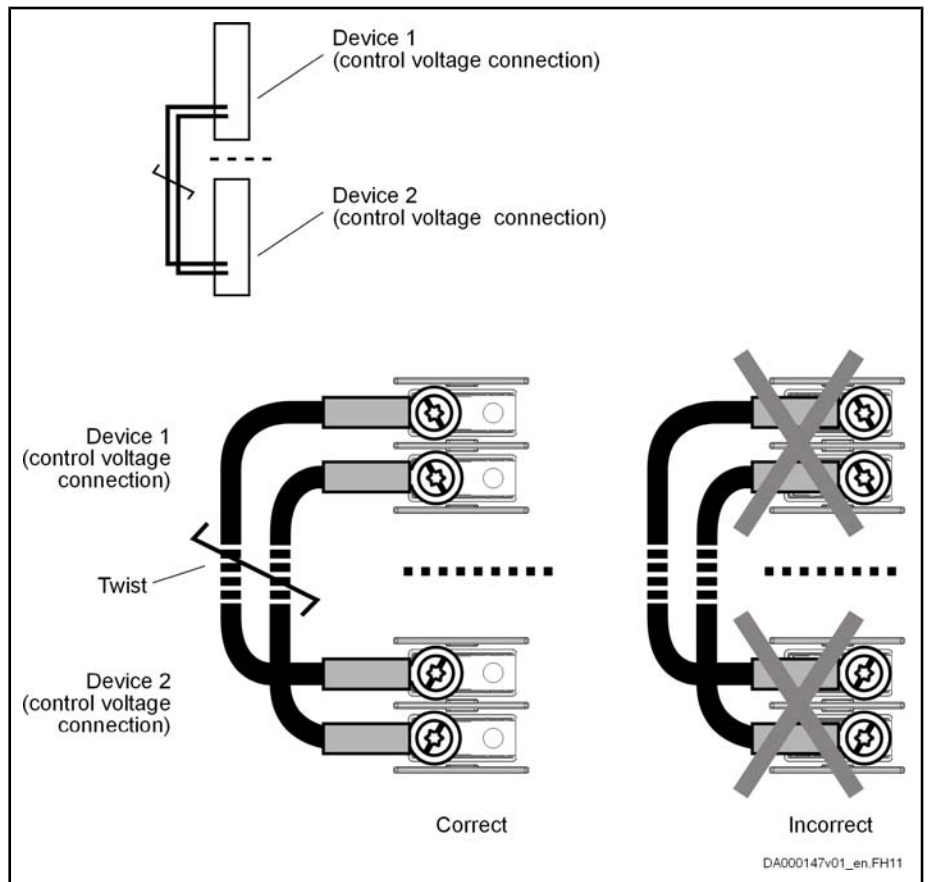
Control Voltage Connections for Cable Routing to the Left
